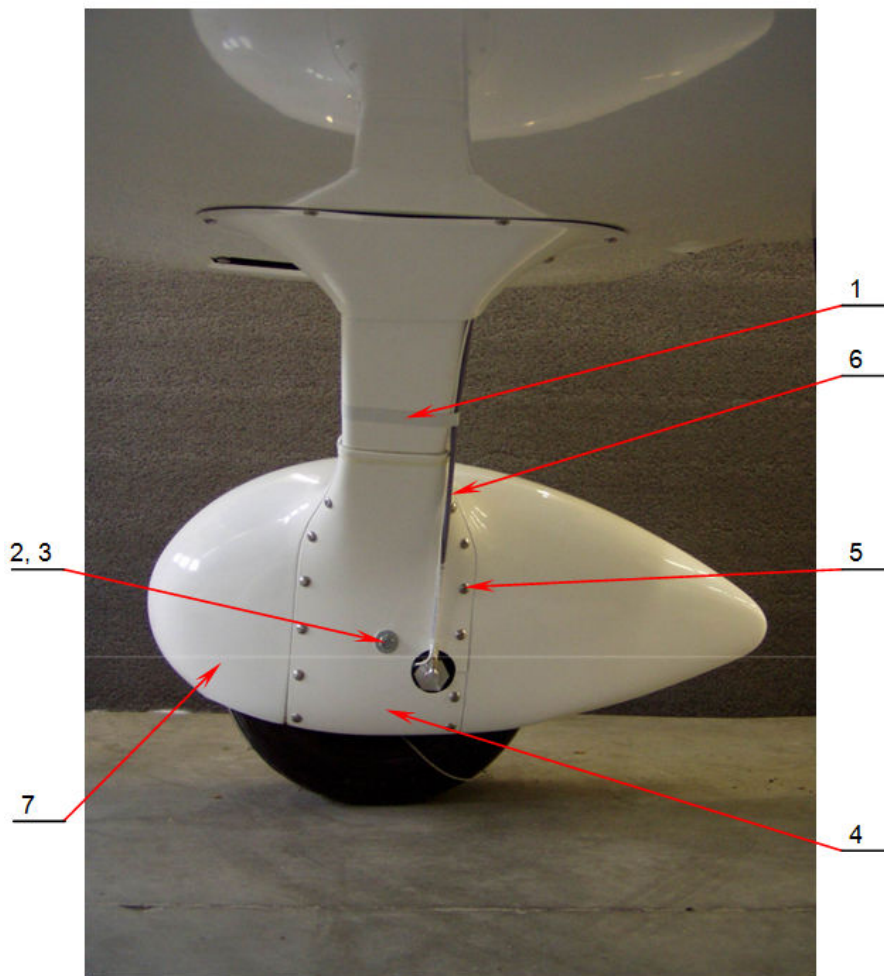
Disassembly of the main landing gear wheel (fixed undercarriage)
